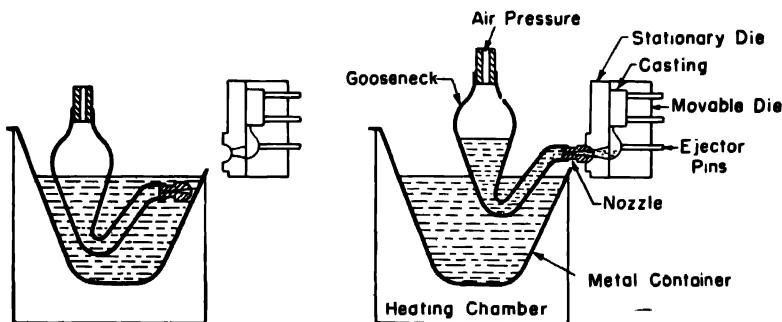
Typical gooseneck-type die-casting machine. The gooseneck, metal container, heating chamber, and die carriage are parts of the same machine.
